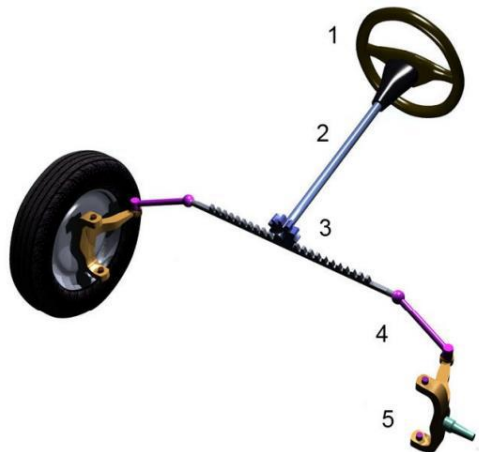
Rack and pinion steering mechanism 1 Steering wheel; 2 Steering columns; 3 Rack and pinion; 4 Tie rods; 5 Kingpins [1].
